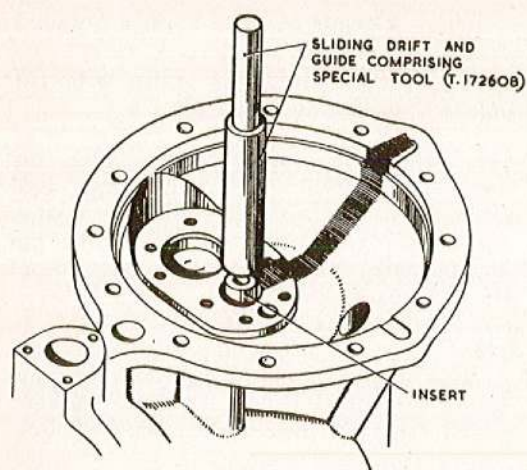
Fitting stall valve adjustment screw insert into main pump body, using tool T.172608
